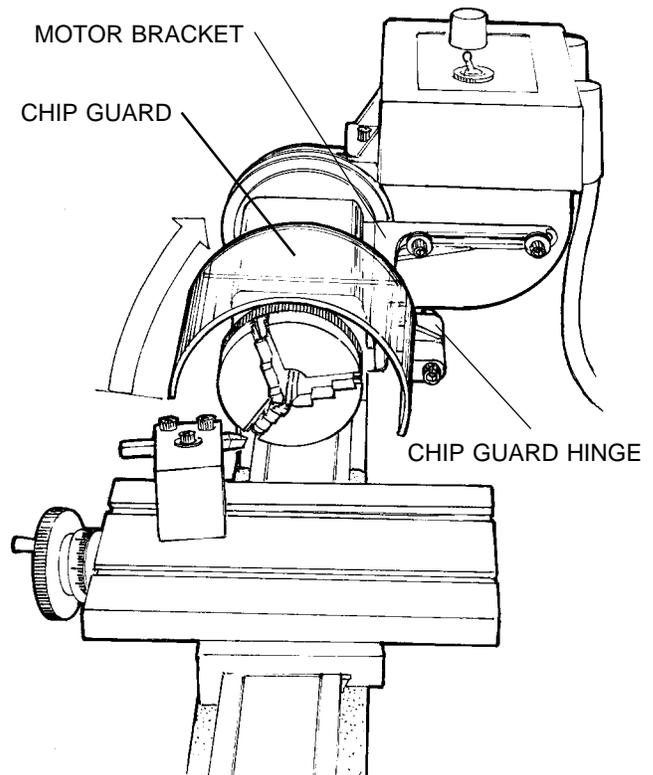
The chip guard mounted on a Sherline lathe. The guard pivots up out of the way for access to the spindle area.
